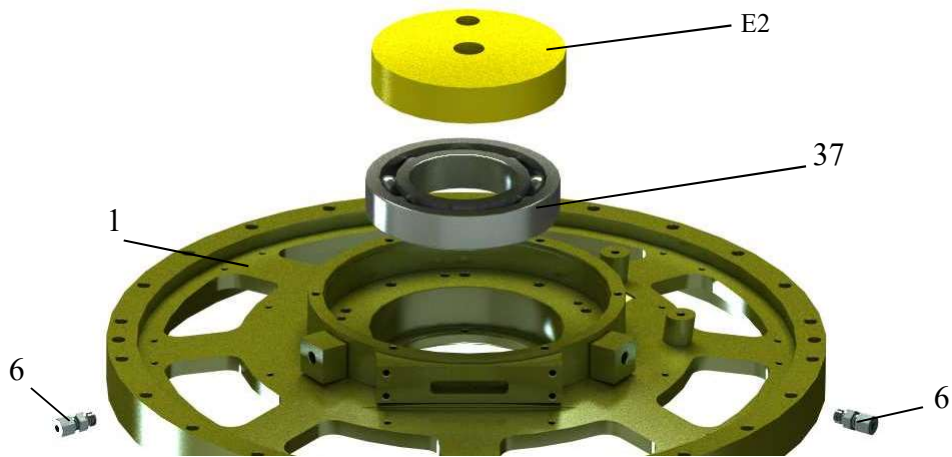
Installation of Roller Bearing into Bearing Shield on the Drive Side
